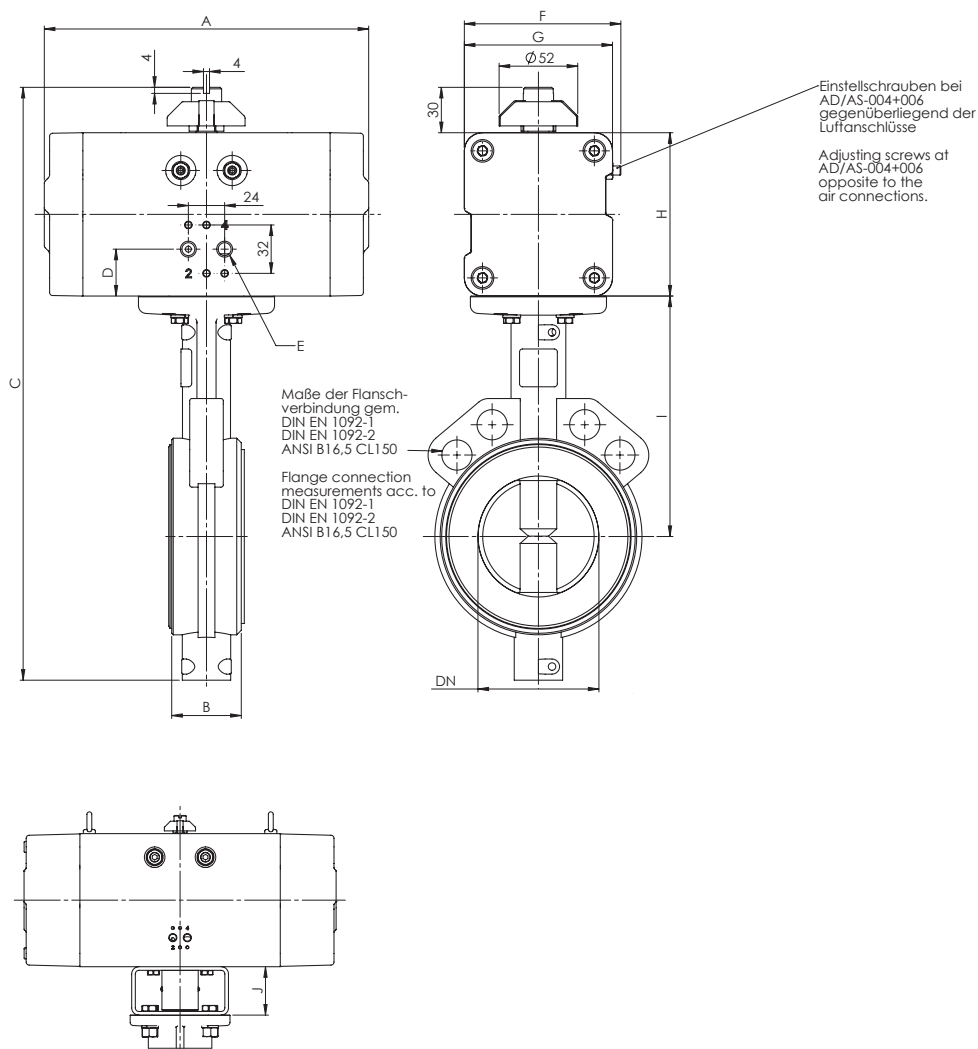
Dimensional drawing Type PZR with actubar type AD/AS-004-230
